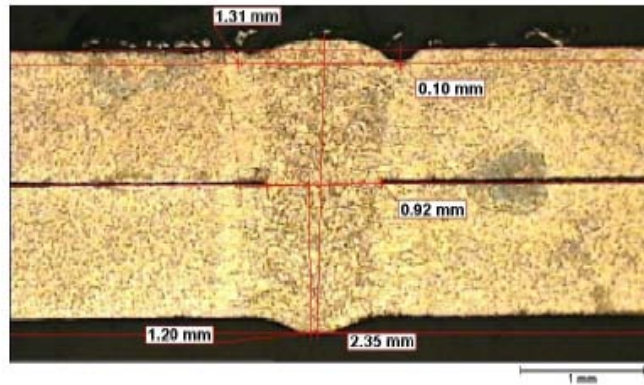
Microsection: Remote laser weld in an overlap joint: 1.2mm to 1.2mm, DC05
